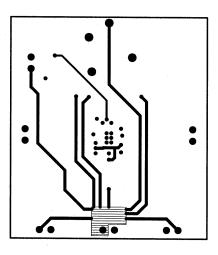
Recommended NHW PC board layout: lower inner-layer layout
